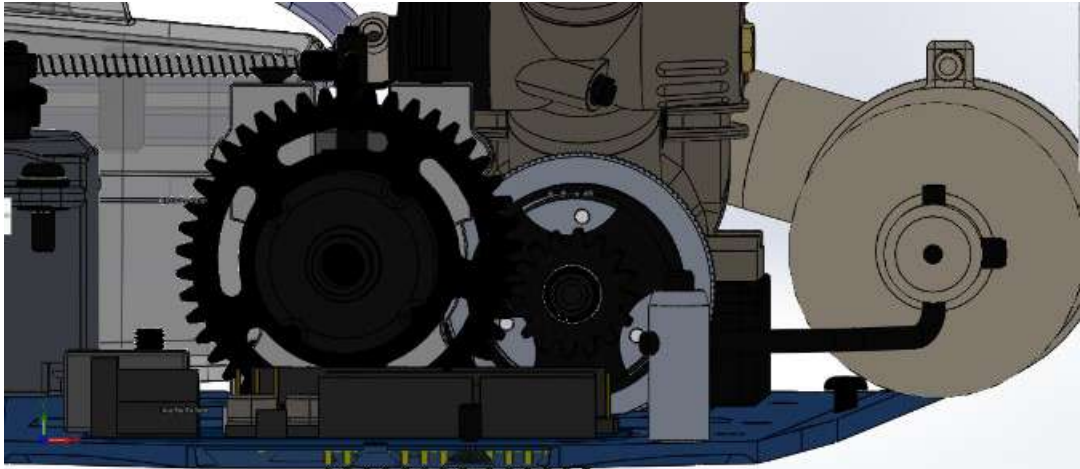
First CAD design, the first design had considered a 1:3 reduction due to a brushless motor with lower RPM. This design was considered due to the constant problems that a geared mechanism could cause.
